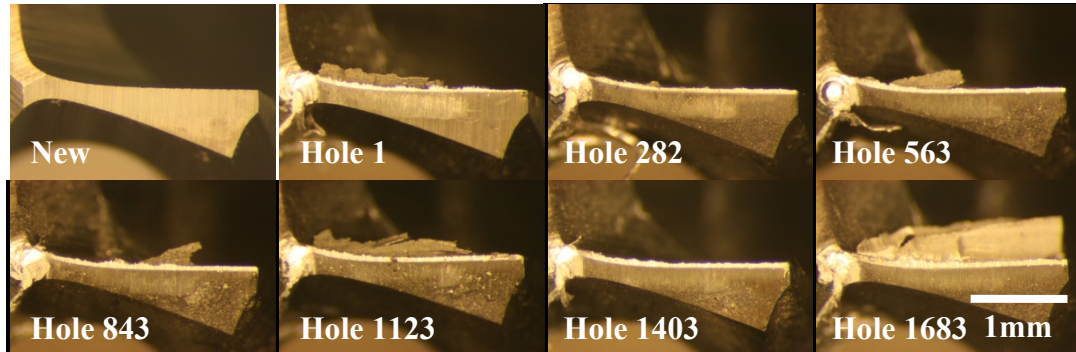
Tool wear micrographs of uncoated carbide drill under 3bar cutting fluid, 130m/min cutting speed (Test 1)
